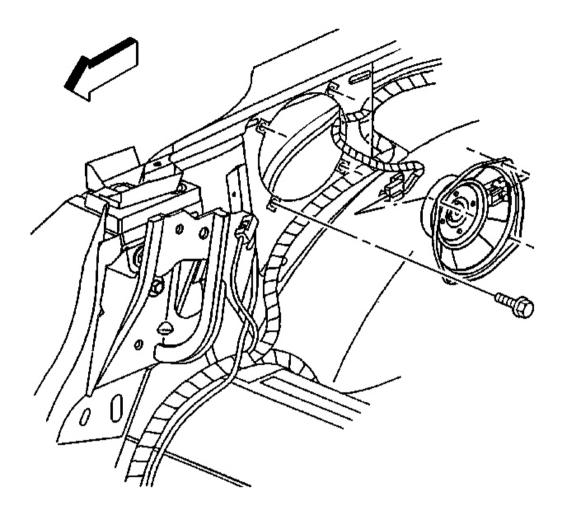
Electrical/Audio Connector At Rear Speaker & Screws Courtesy of GENERAL MOTORS CORP.
